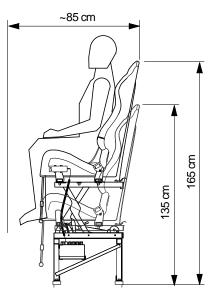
ELECTRIC VERSION SEAT DIMENSIONS
